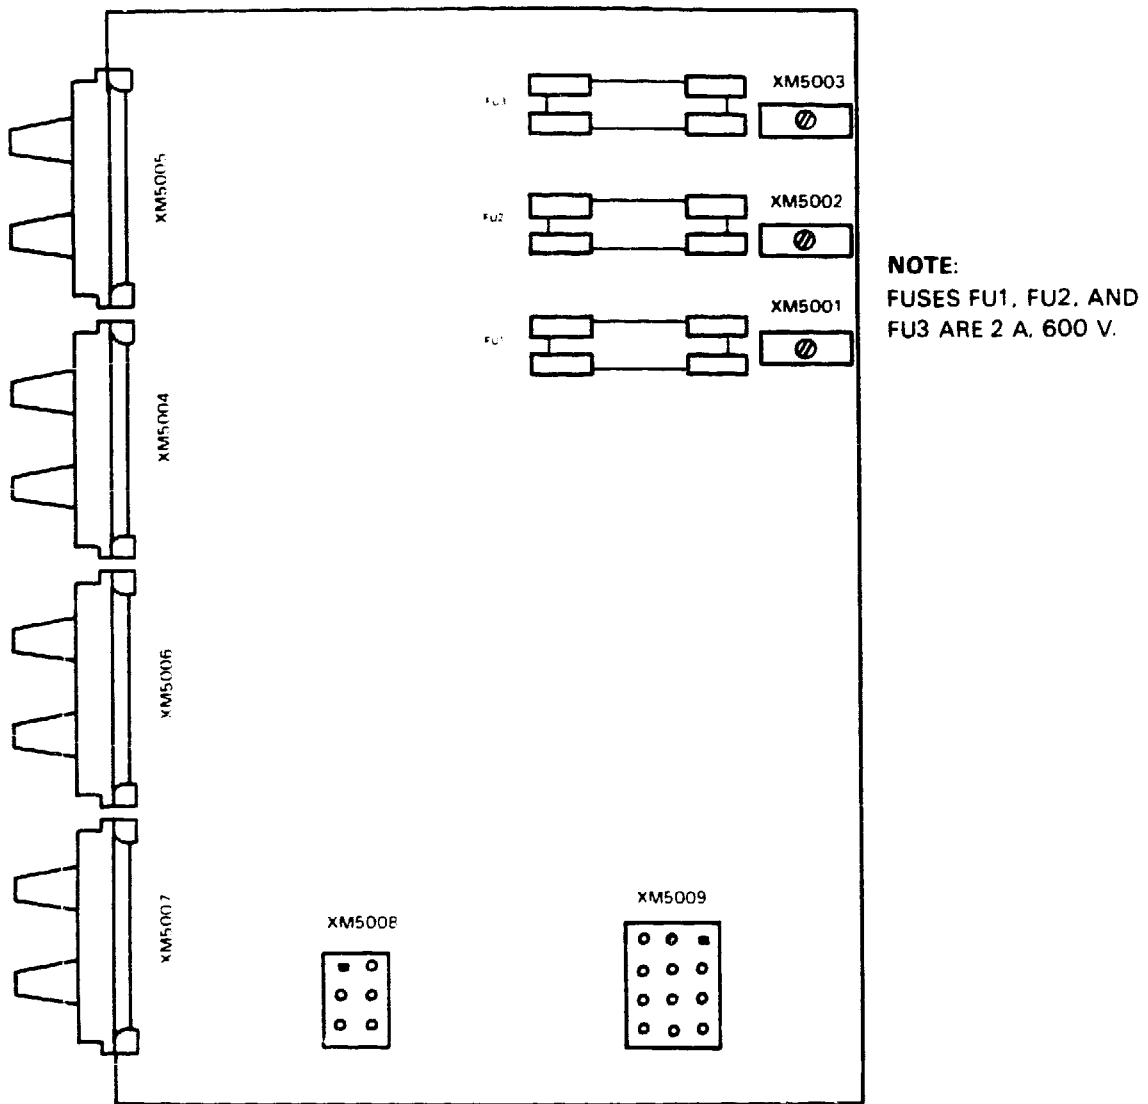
is an assembly drawing showing the location of the fuses and connectors on the TACO board.
